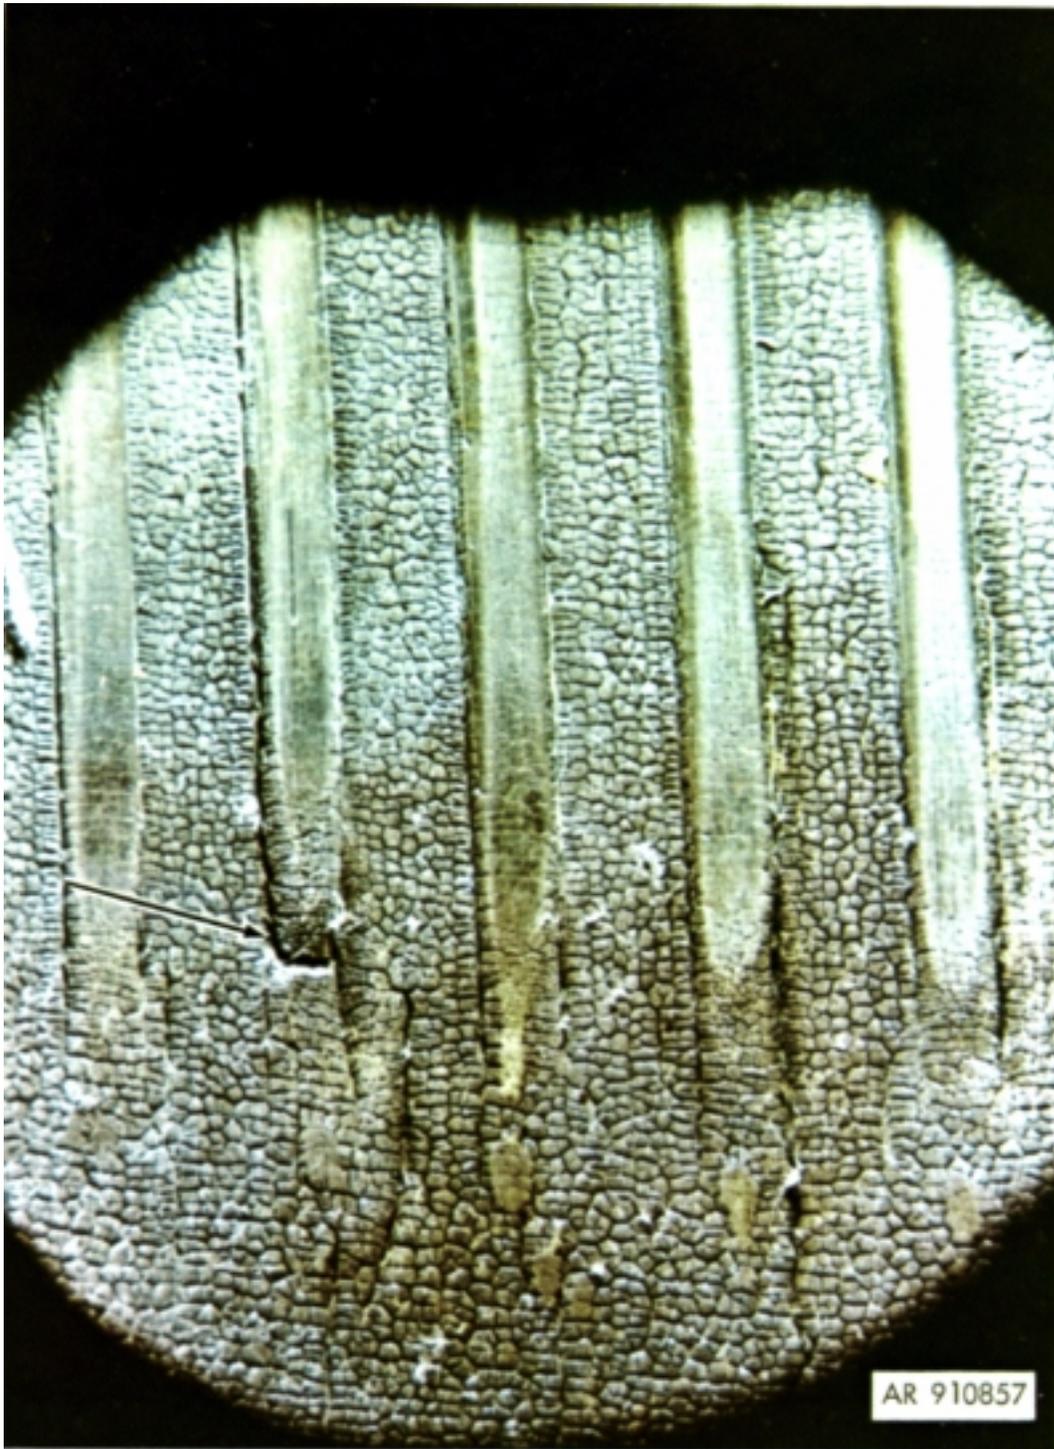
Single crack and two incipient cracks at origin of rifling.
